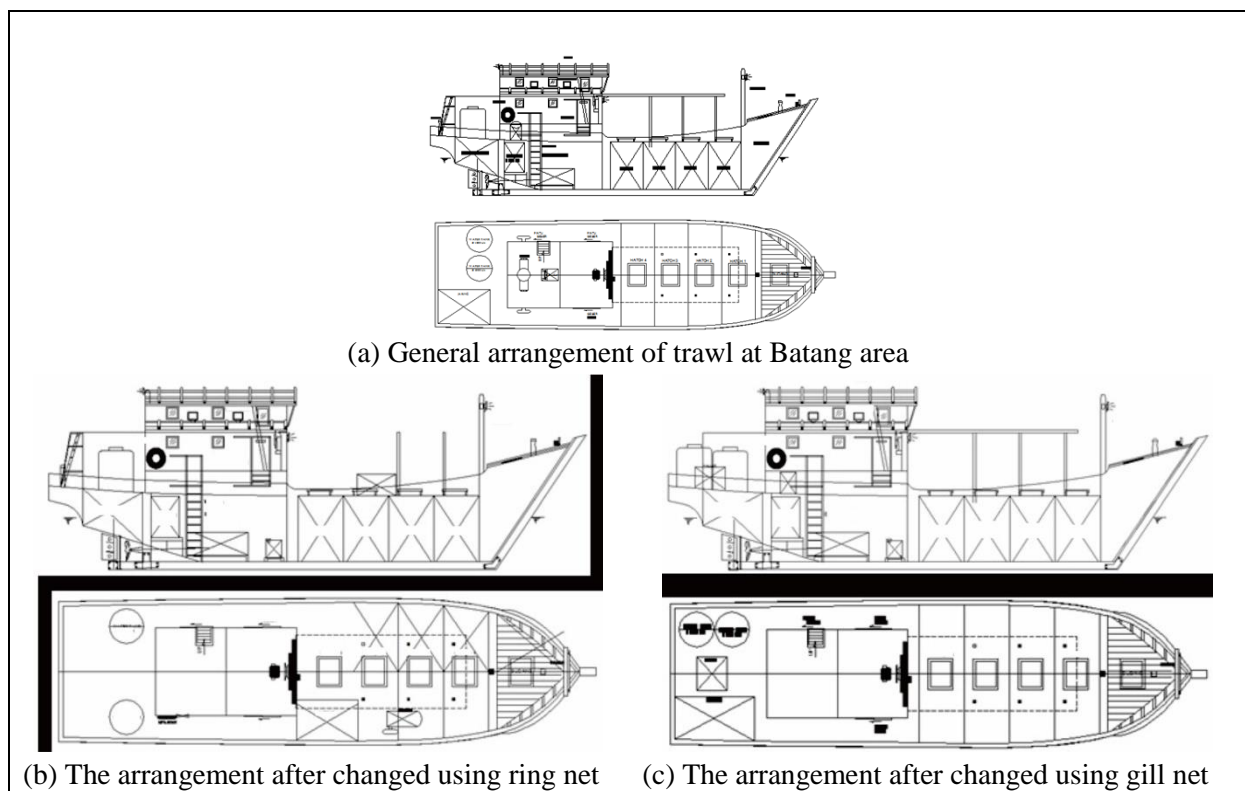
The ship's general plan layout plan after reconstruction at Batang area.
